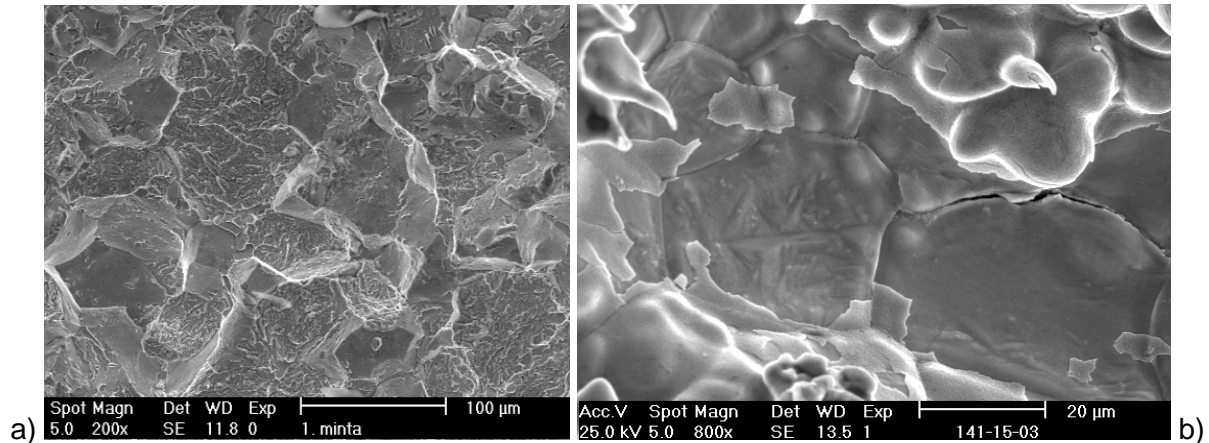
Brittle fracture (a) and hot crack (b) in the weld metal
